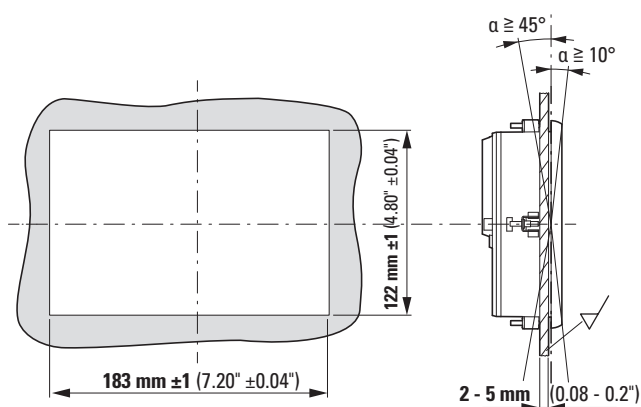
Mounting cutout for 7.0" front mounting devices in mm (inches)
